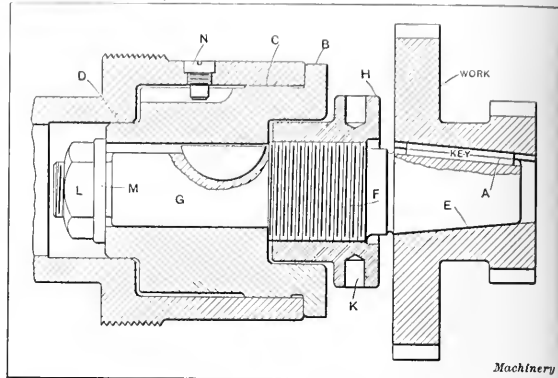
Taper Arbor mounted in Spindle and equipped with Nut for removing Work
